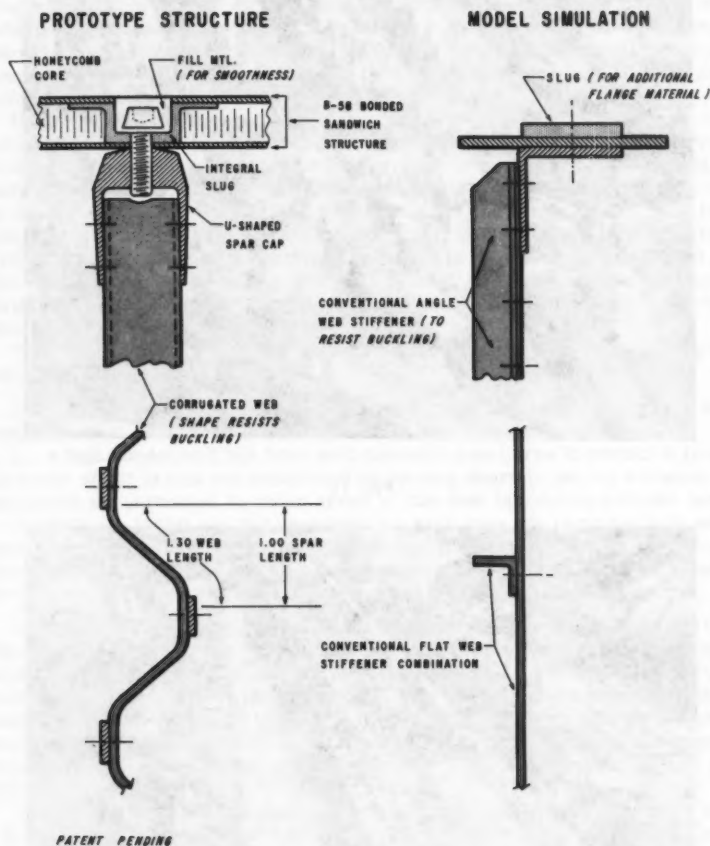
VIEW OF TYPICAL B-58 AND ELASTIC MODEL STRUCTURAL DETAILS FOR SURFACE PANEL AND SUBSTRUCTURE, INCLUDING MODEL REPRESENTATION OF BONDED SANDWICH PANELS AND CORRUGATED WEBS
